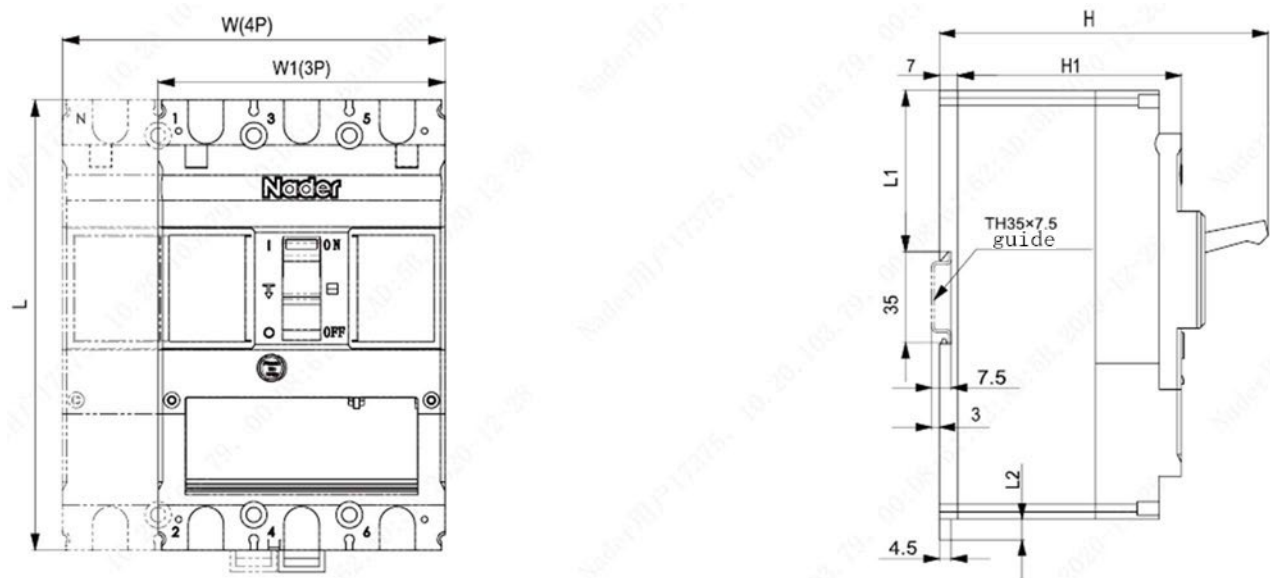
3P、4P Outline and installation dimensions drawing of guide rail type safety rotation products
